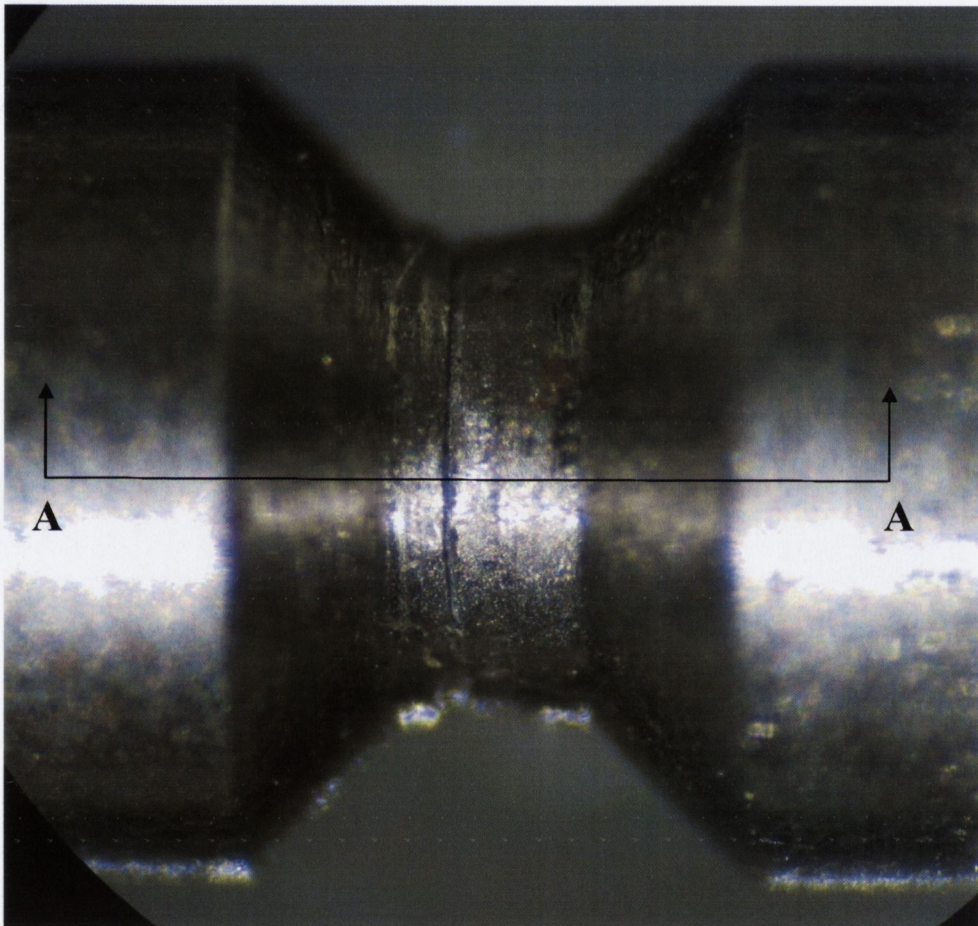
Photograph of the second groove surface of a fully Form Rolled fastener. (x4)
